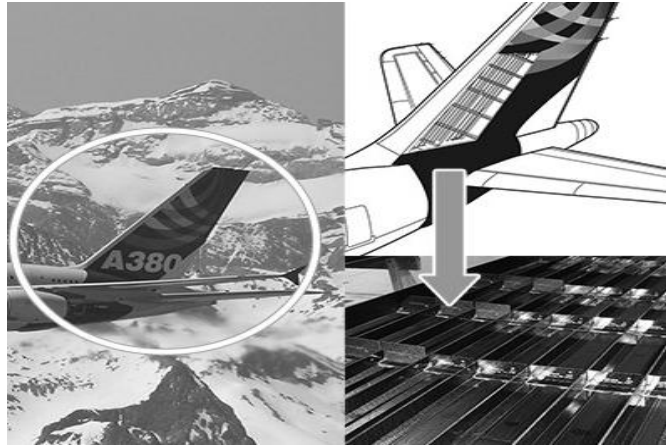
Vertical Stabilizers of the A380 made from pultruded CFRP beams
